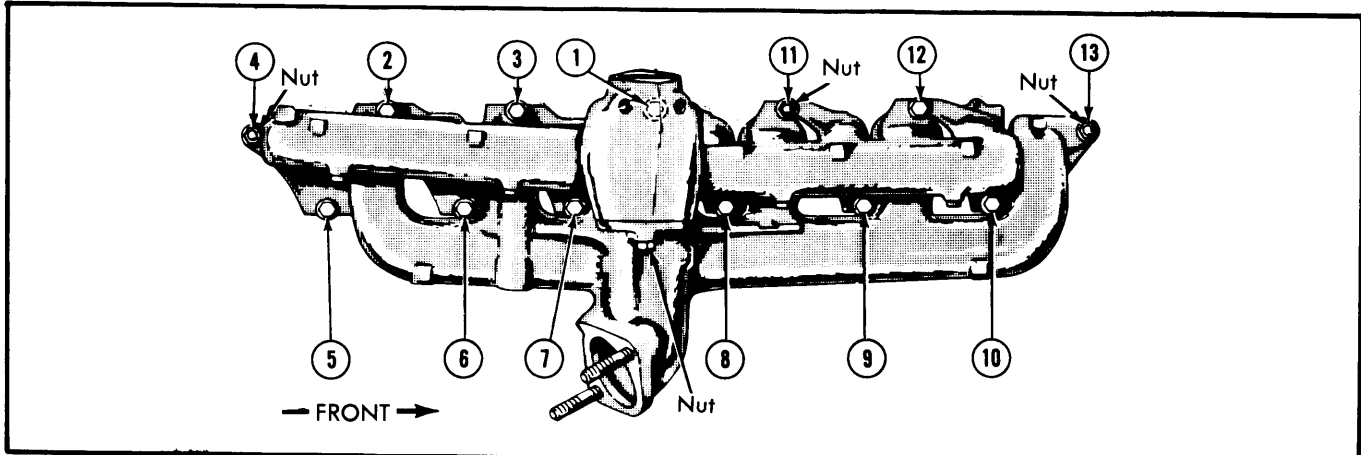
Tightening Sequence for Intake and Exhaust Manifold
